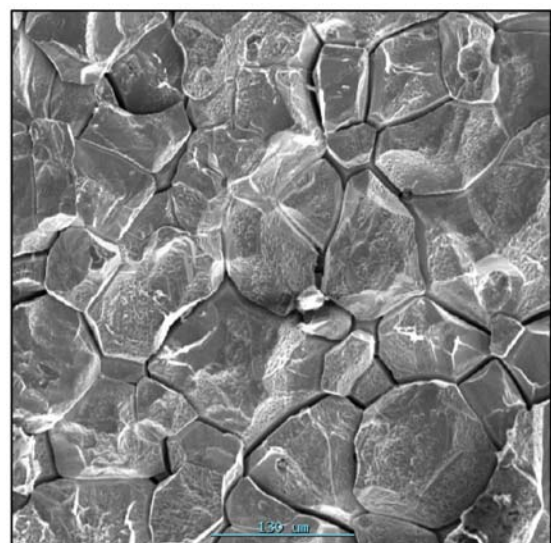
HAZ of the 2 mm thick AISI 409 welded at a heat input of 0.14 kJ/mm (Modified Practice Z)
